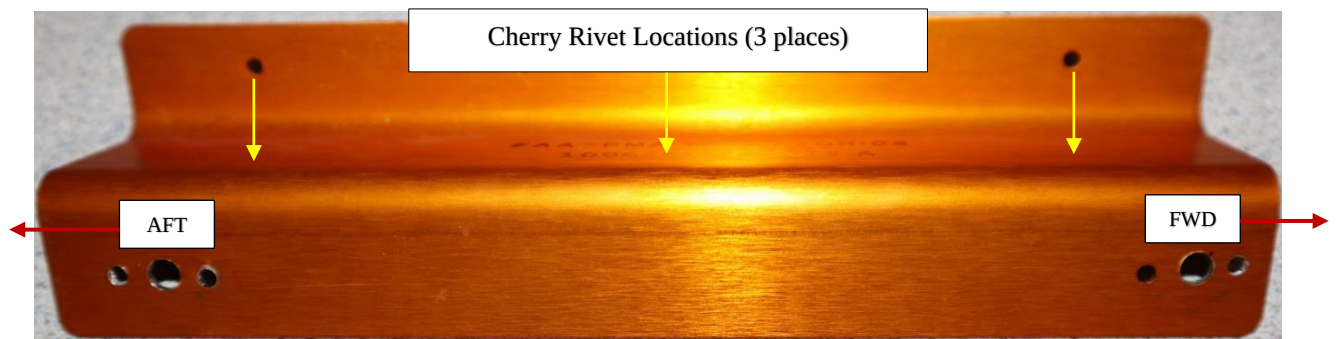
ZEE ANGLE DRILLED FOR NUTPLATES
